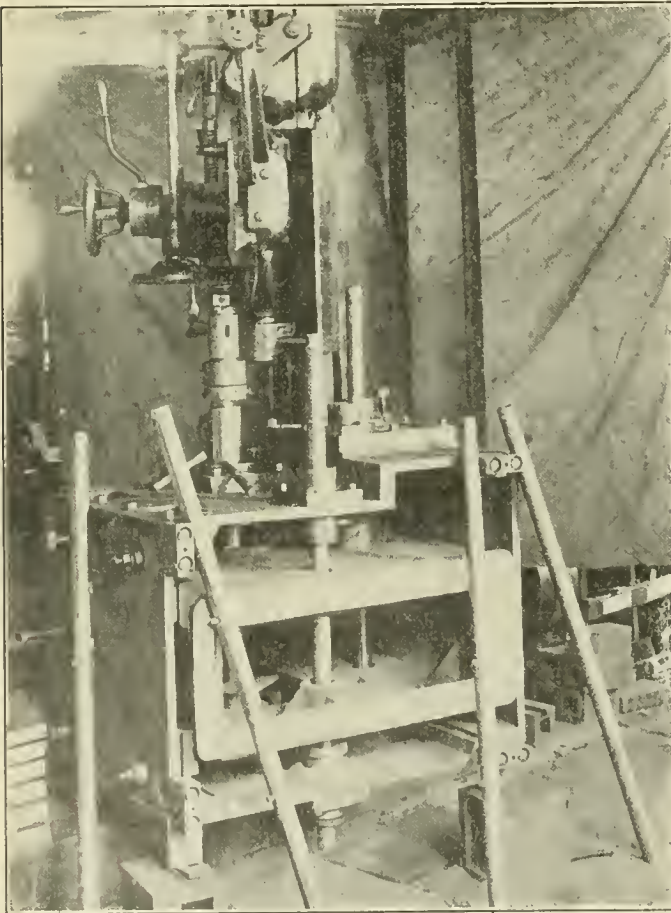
BORING JIG FOR SHAPER COLUMNS.
